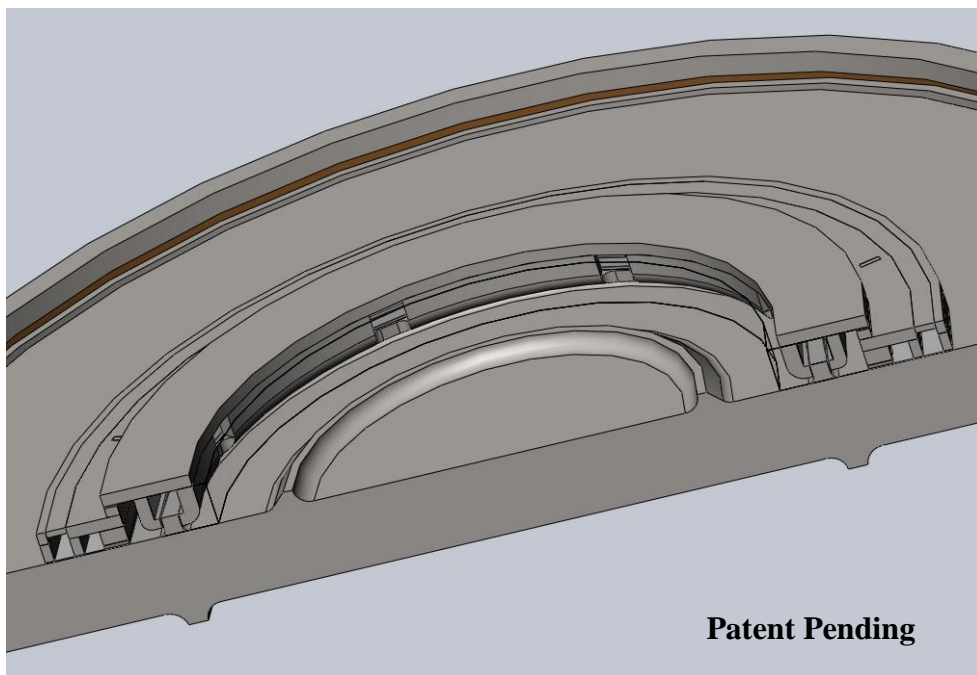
2D Concept Draft of Magnetic Combo Bearing with Disk
